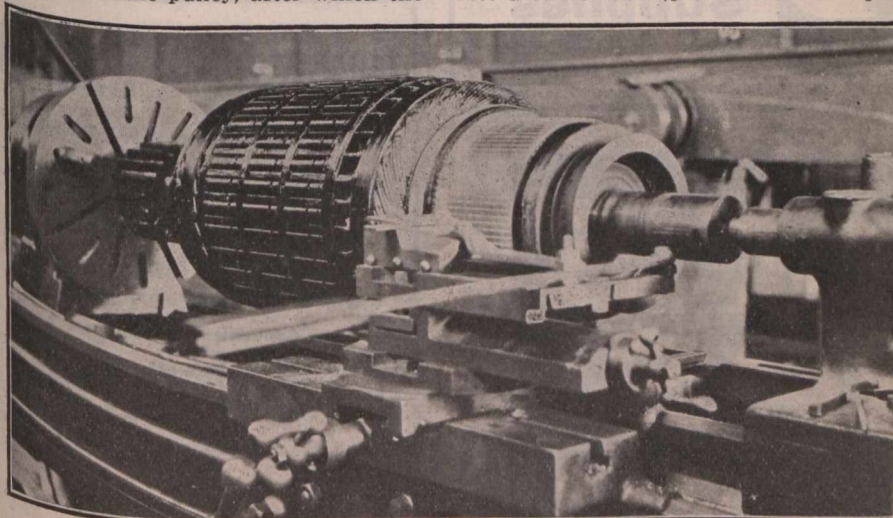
Commutator Slotter mounted on slide rest of lathe.
